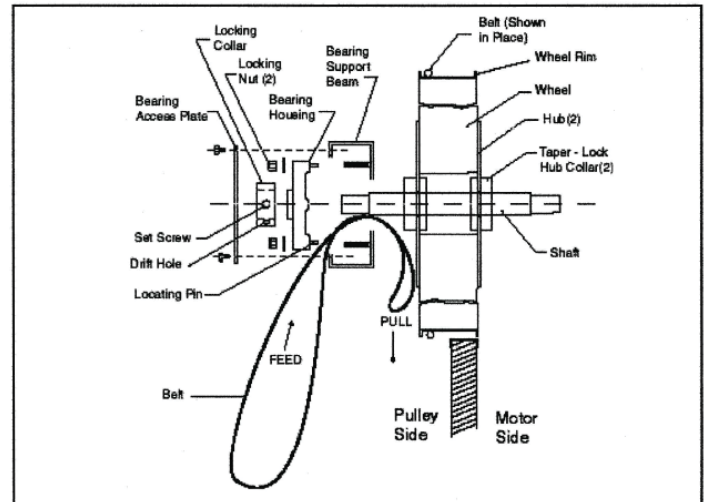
Belt Replacement (Figure 8 shown with diameter seals removed)
